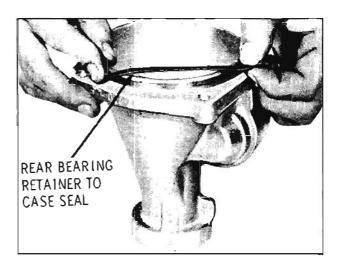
Removing Rear Bearing Retainer to Case Seal
